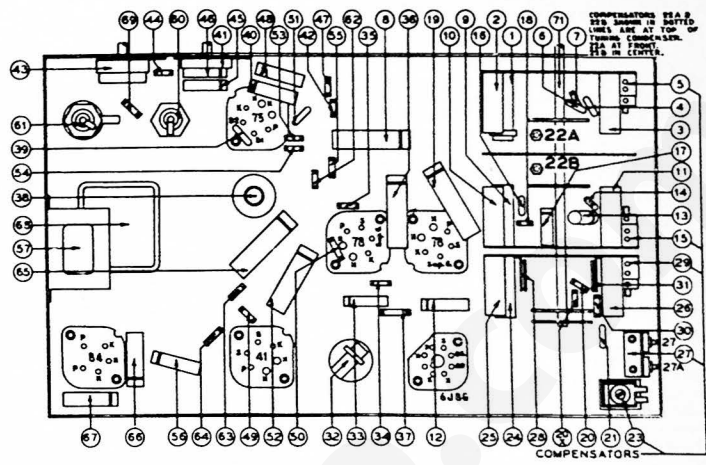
MODEL 40-725 PART LOCATIONS, UNDERSIDE OF CHASSIS.
